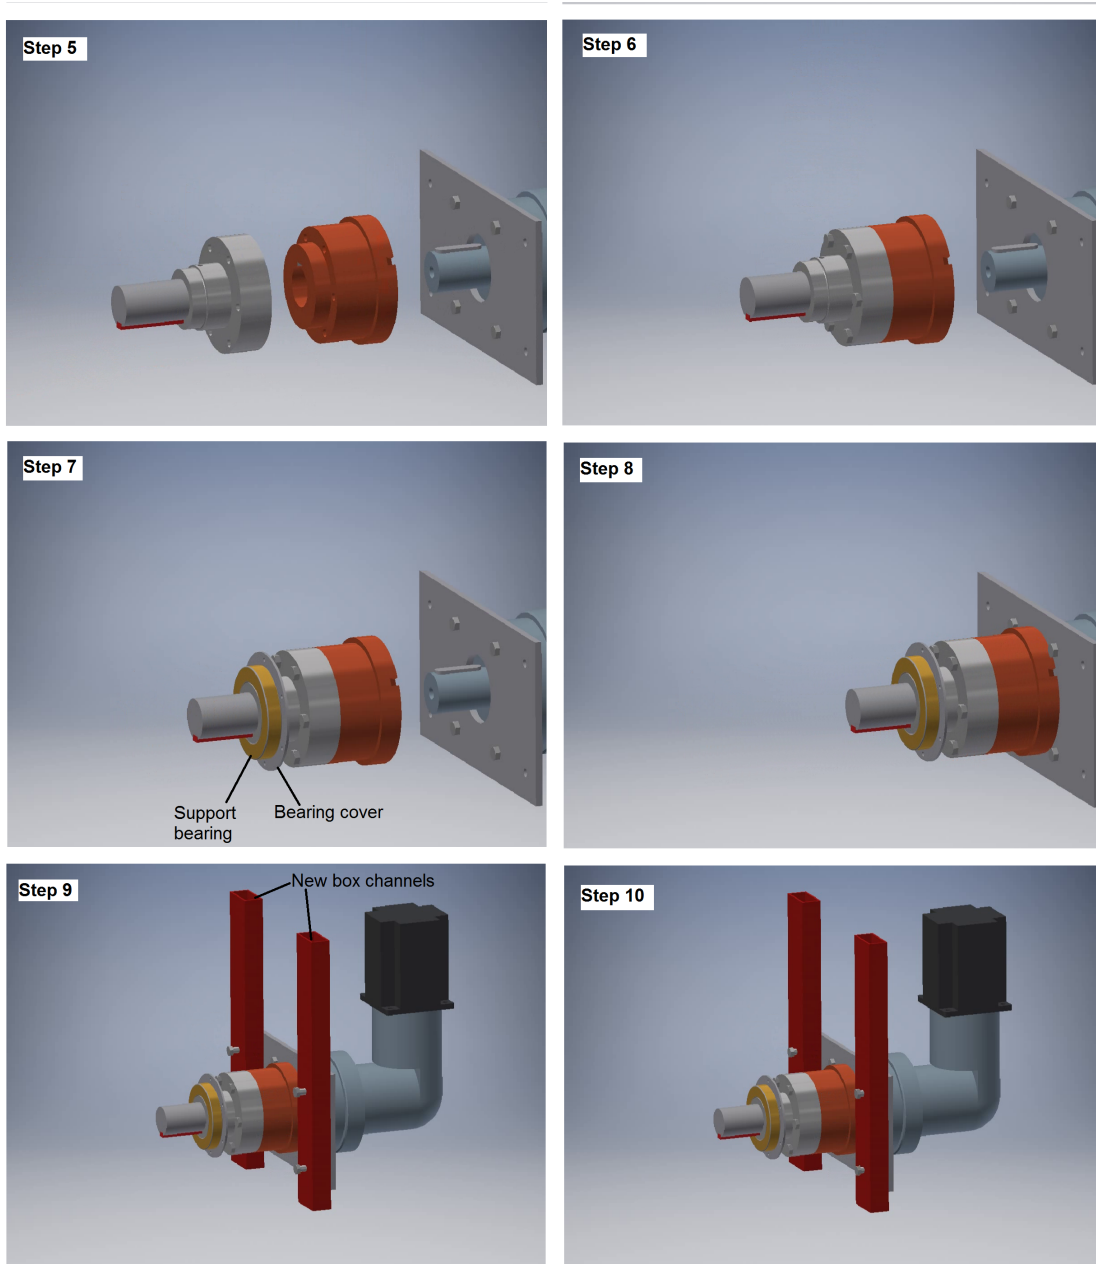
Procedure for assembly-1 of the clutch system - bolting of gear box, clutch, adapter and new box channels - Step5 to Step10.
